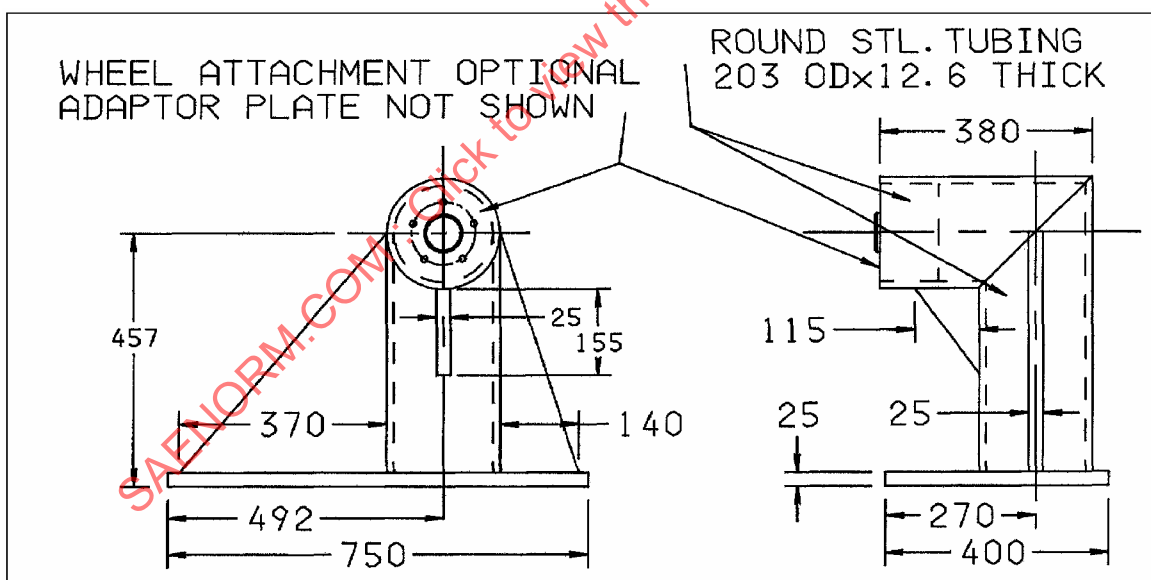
SAE J1981 WHEEL HOLDING FIXTURE
